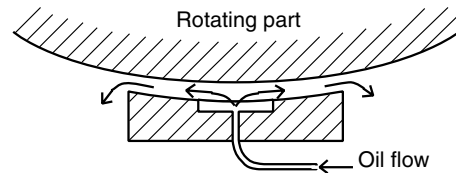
Principle of the hydrostatic bearing used to support the rotating parts of a telescope (tube and mount) with minimal friction.
